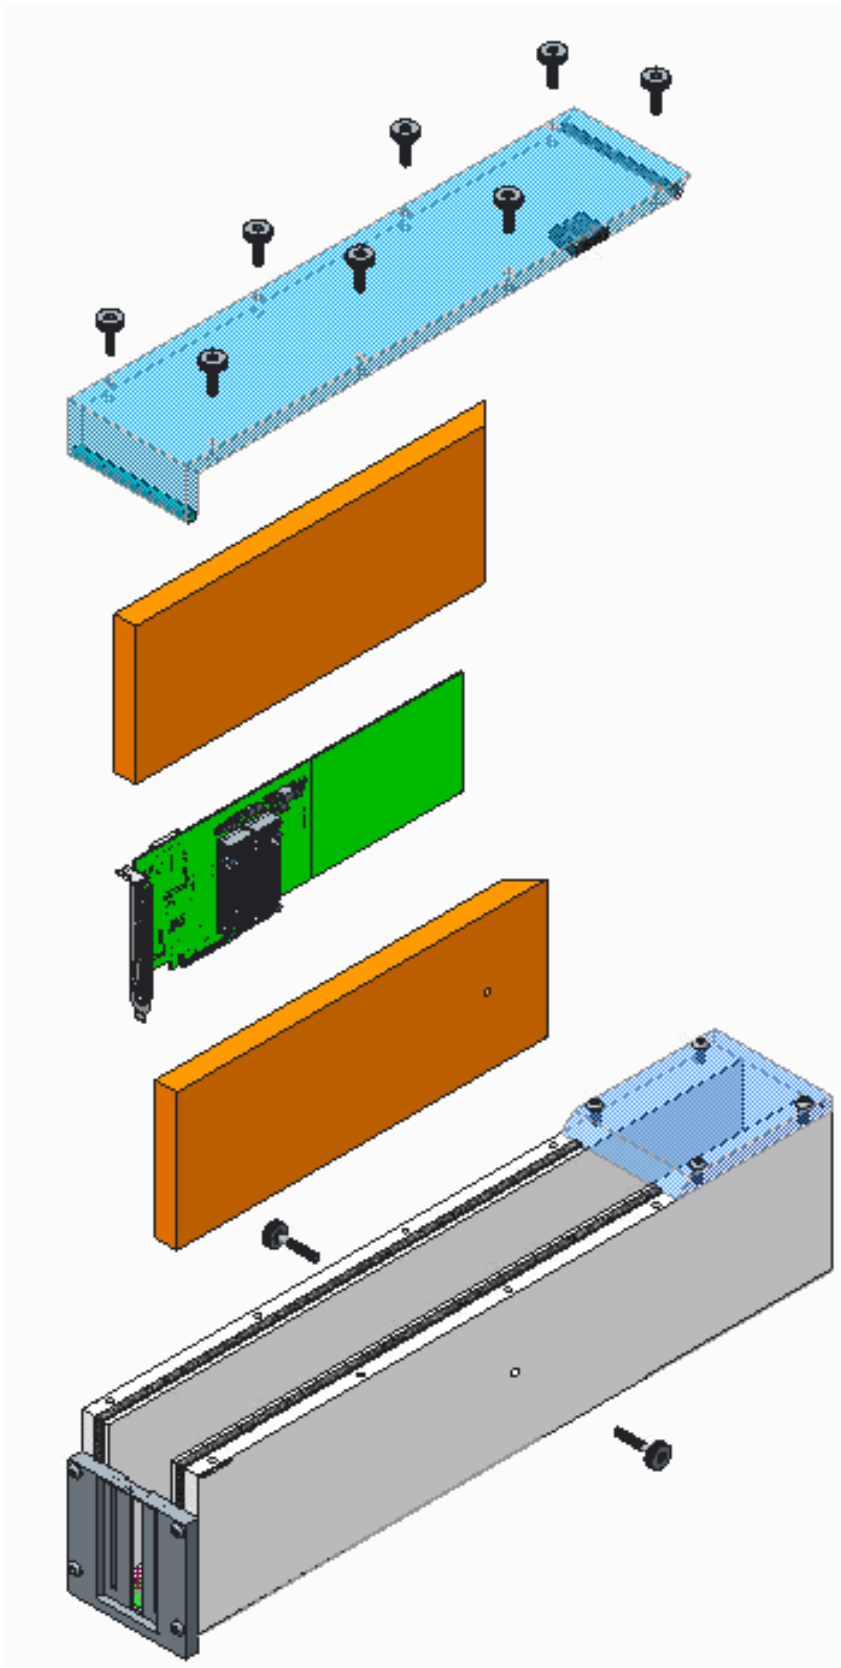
Tester isometric exploded view, lid and impedance blocks removed
